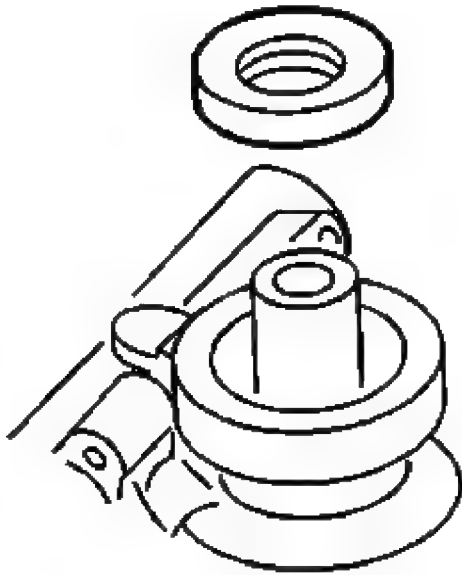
Identifying Power Steering Pump Drive Shaft Seal
